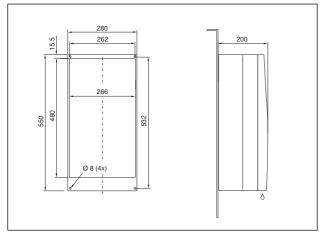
SK 3303.xxx/SK 3361.xxx external mounting
